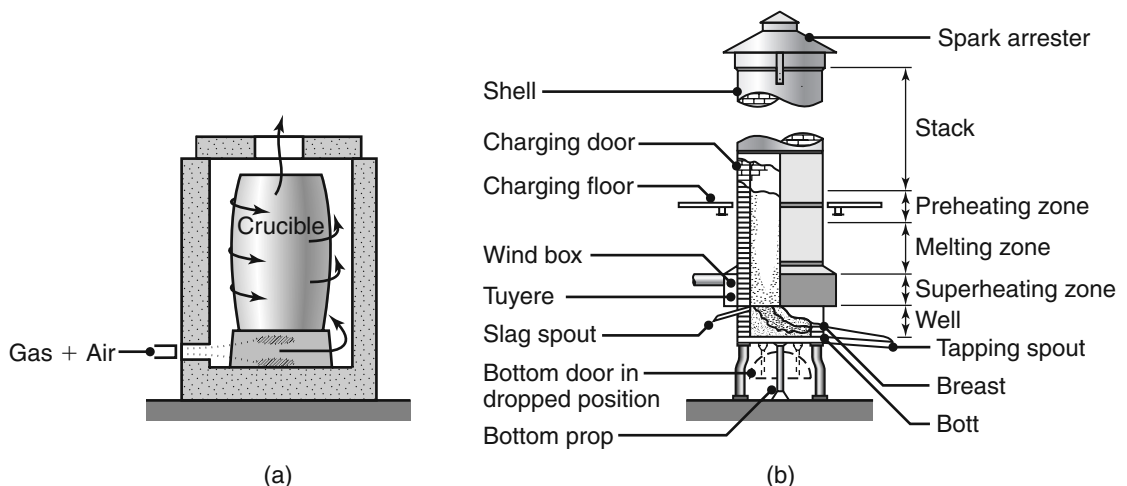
Two types of melting furnaces used in foundries: (a) crucible and (b) cupola.
